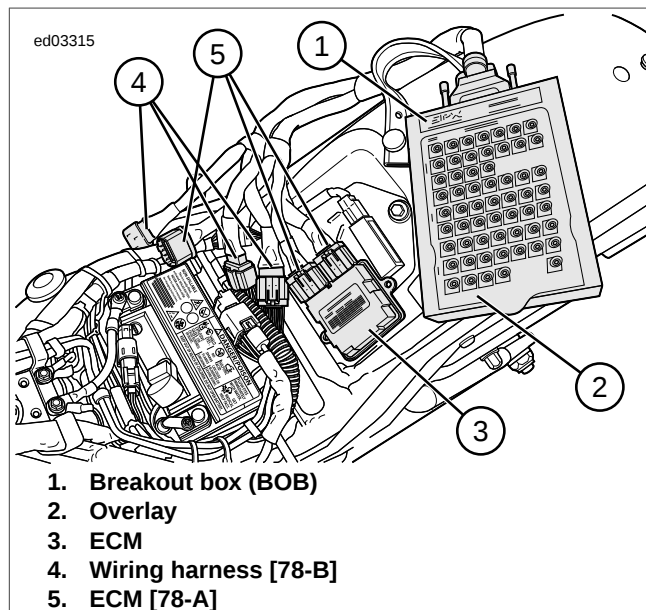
ECM Breakout Box Connection: Except FXSB
